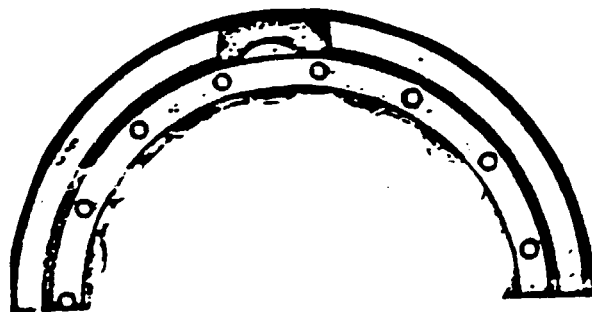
Rear side of the bearing shown in Fig. 8 with a shell-shaped fissure on the edge of external ring opposite to the impact point.
